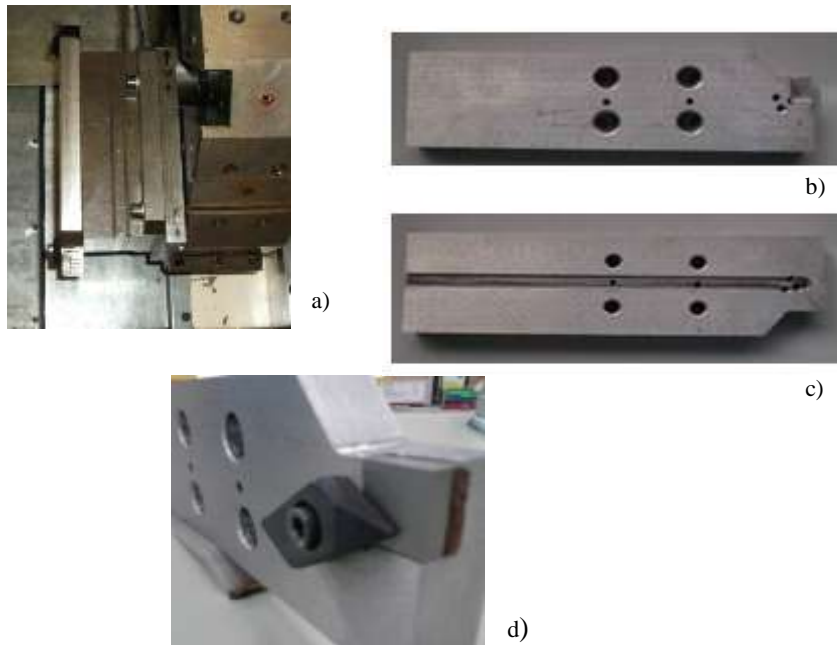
Tool Holder: a) Assembled in the Dynamometer b) Front Side c) Back Side d) Assembly of the Cutting Insert and the Insulating Plate by the Side Support
